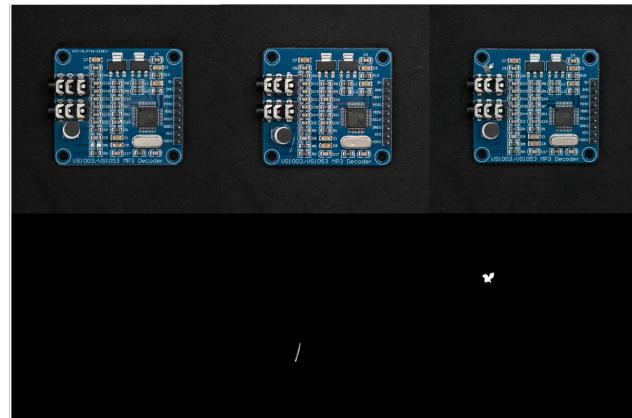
Defects in PCB sub-dataset - top row(left to right) : Normal, scratch, Soldering Melt; bottom row(left to right) : Ground truth masks
